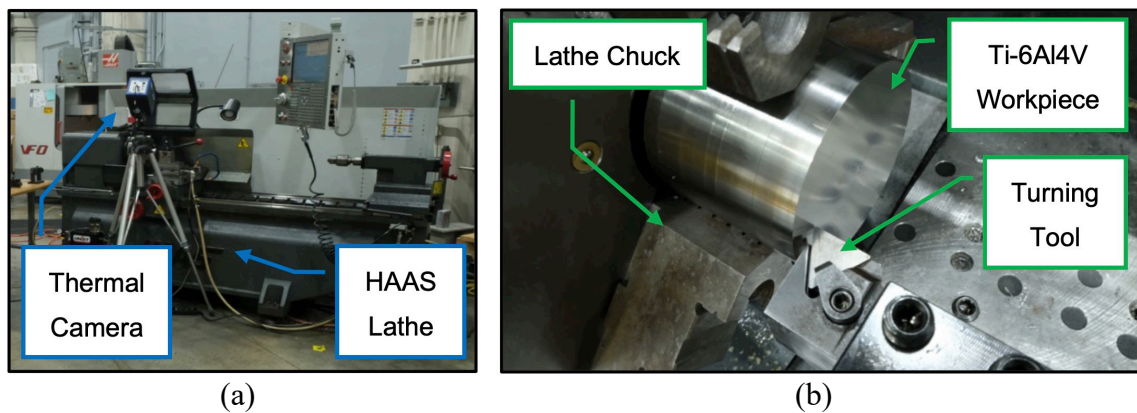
(a) HAAS TL2 CNC lathe used to perform cutting tests; (b) Kennametal TPGN K-68 tool of $r_c = 0.8$ mm tool being touched off the Ti-6Al-4V workpiece. Adapted from author's published work with permission from MDPI [16].
